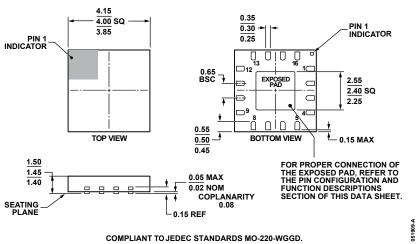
16-Lead Lead Frame Chip Scale Package [LFCSP\_LQ] 4 mm × 4 mm Body, 1.45 mm Thick Quad (CP-16-14) Dimensions shown in millimeters
